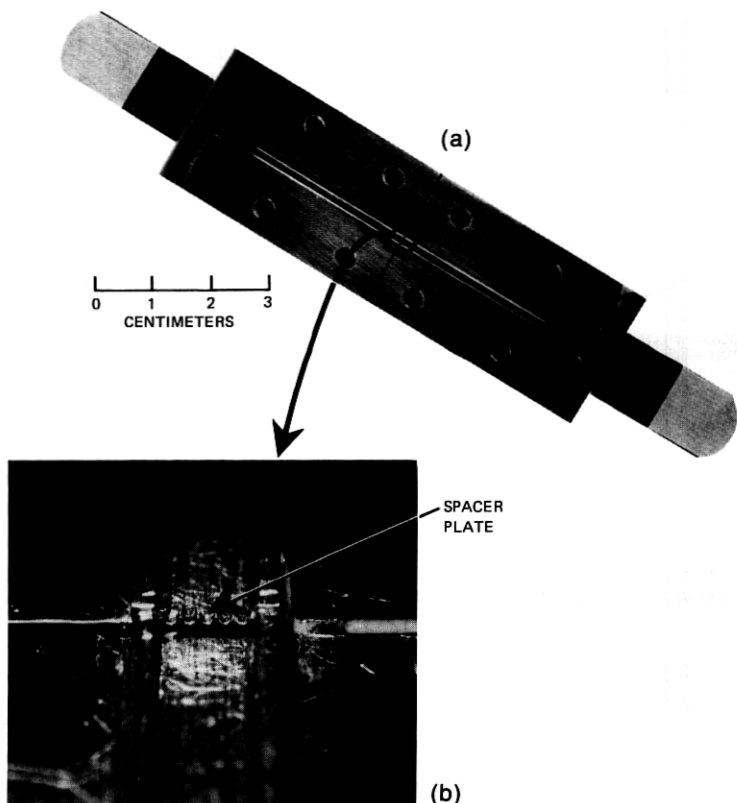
Photograph of the mold used for these experiments. (a) Overall view. (b) Close-up view of precision spacer.
